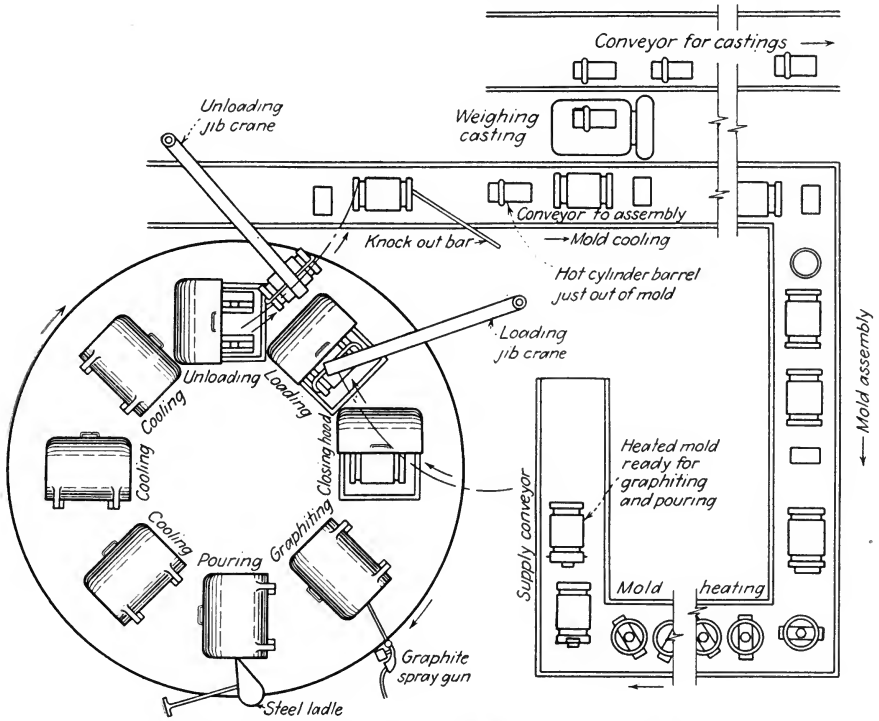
A double circular layout for centrifugal casting of engine cylinder barrels. The eight-station turntable at left has facilities for closing hood, graphiting, pouring while mold is rotating, and cooling; as well as loading and unloading. The second line on a roller conveyor takes away the molds after shake-out, relines and preheats molds, and supplies them to the turntable. (Courtesy of Aviation.)
